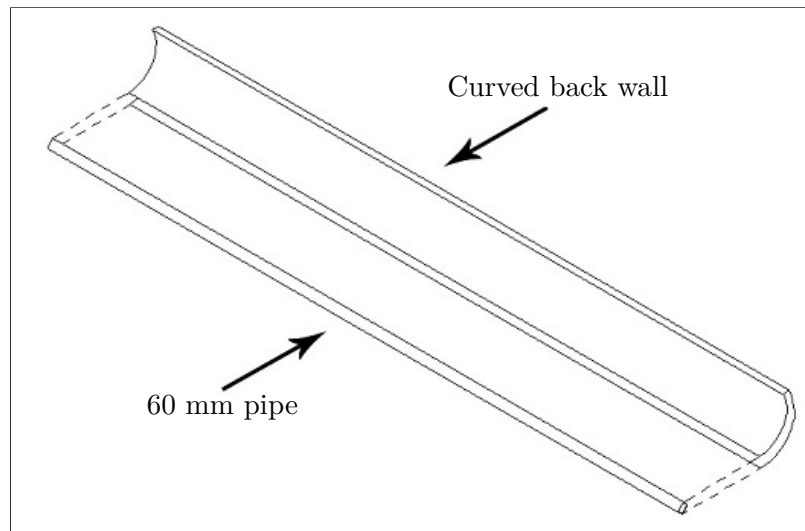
3-dimensional CAD drawing of the 32-OWC chamber stainless steel model.
